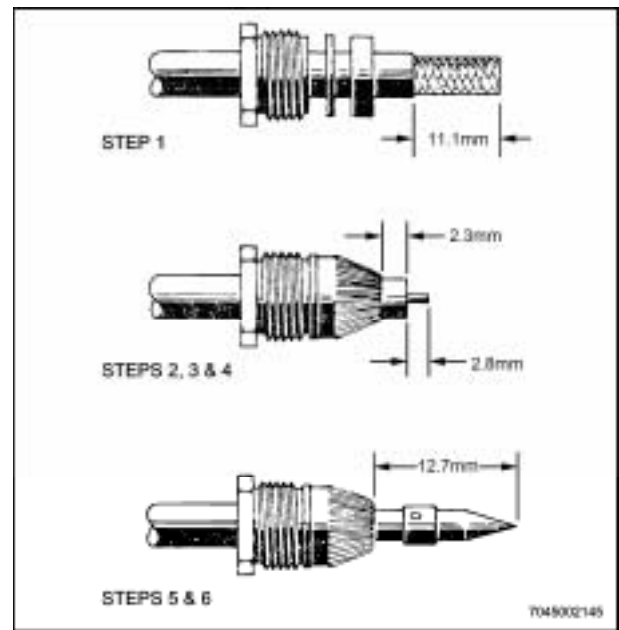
Attaching Avien 163-088 and 163-089 Connectors to Coaxial Cable
